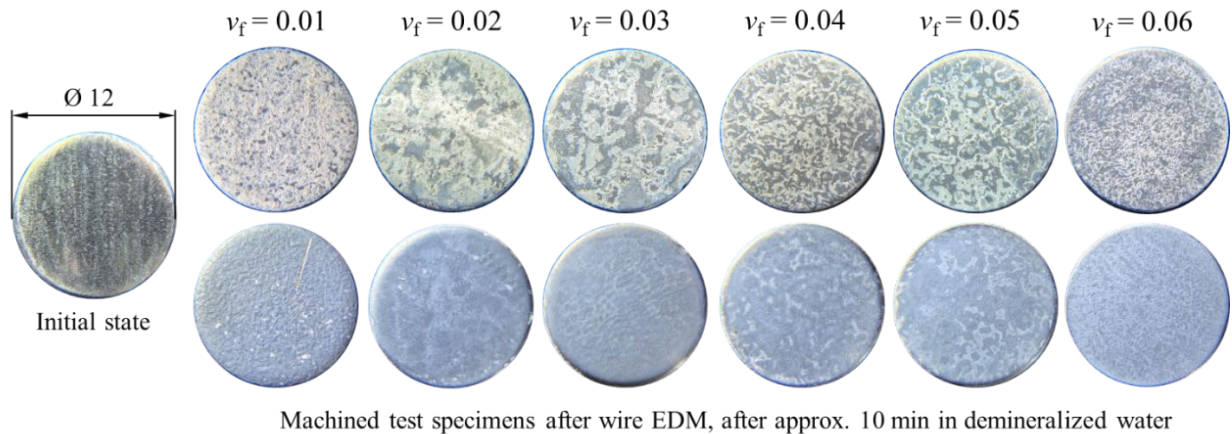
Initial state surface and resulting surfaces (top view of the test specimen)
